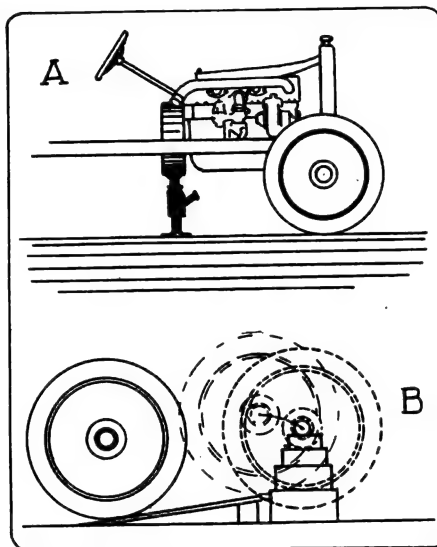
(A) Locating Loose Bearings; (B) Jacking Without a Jack.
